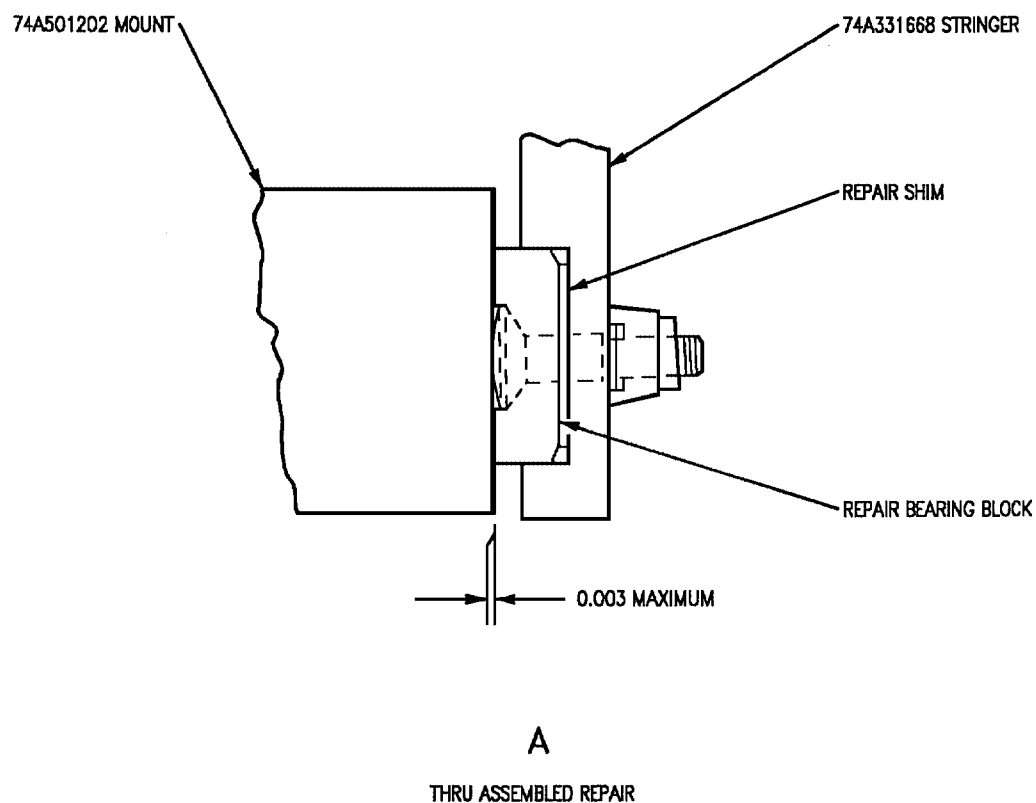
Bearing Block 745A331176 and Shim Repair (Sheet 1)
